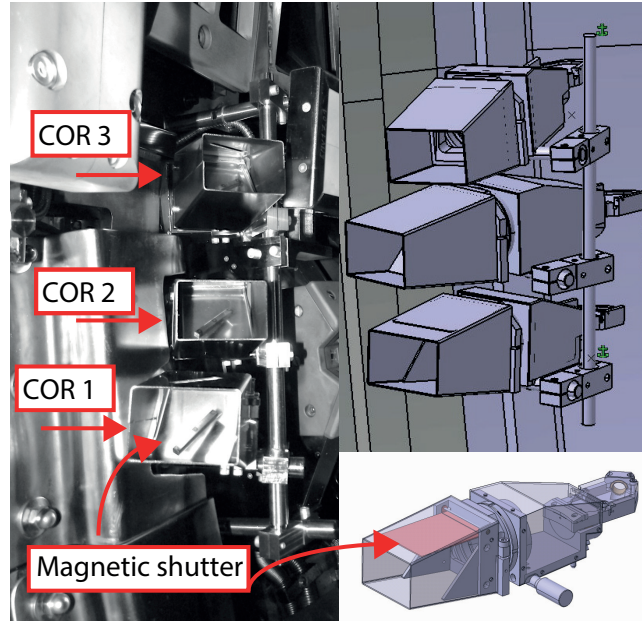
Three new optical heads have been installed in the AUG vacuum vessel between sectors 5 and 6 behind the adjacent limiter shadow. A photograph of the optical heads is shown on the left, while on the right technical drawings for these heads are shown.
